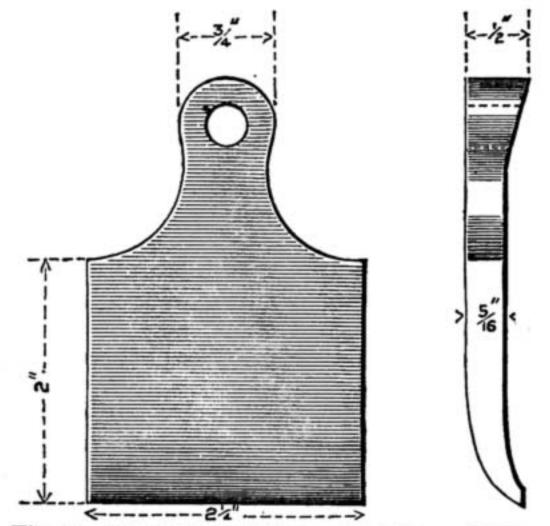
Lever: Front View. Fig. 5 A.—Ditto: Side View.
